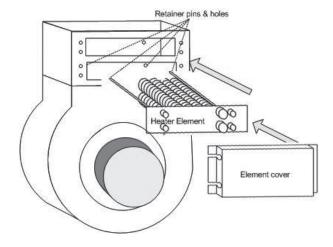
With Collar removed insert heater element(s) (one shown in this diagram), wires not shown in diagram.
